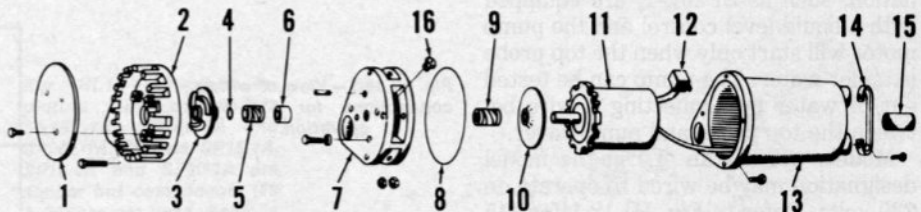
Exploded view of LSP2 series submersible pumps.
